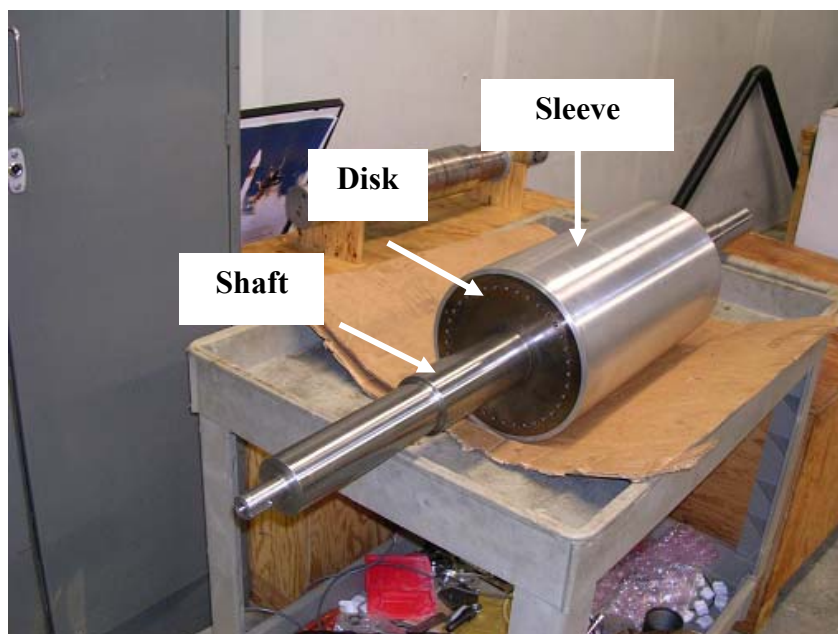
Single-disk rotor installed on the ball bearings at the Turbomachinery Laboratory
